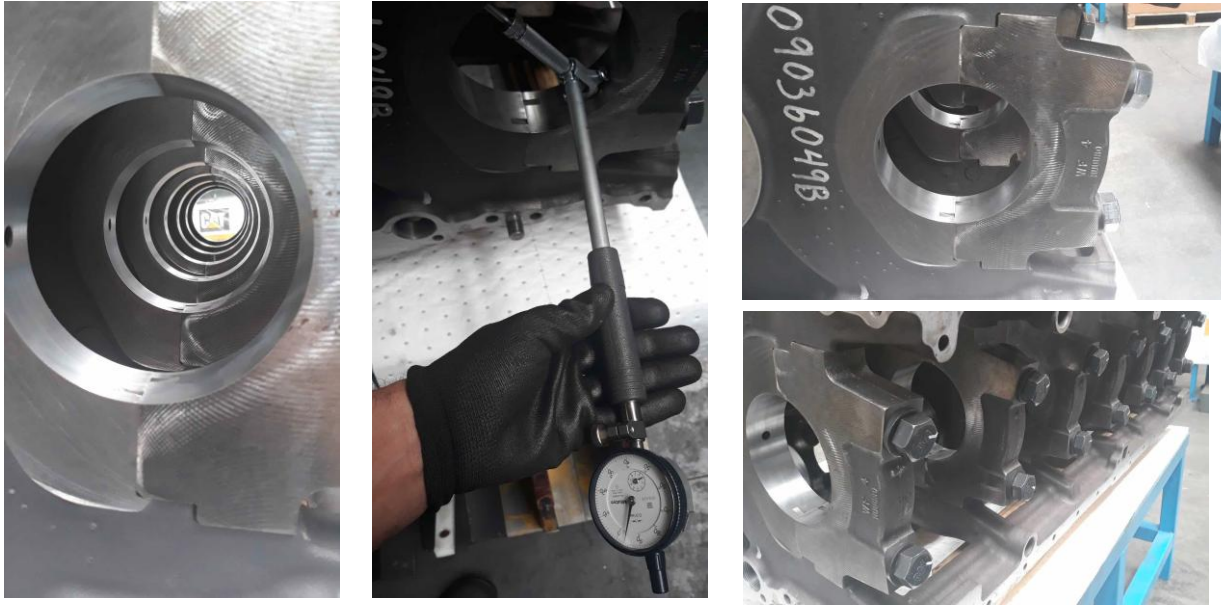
Measurement of main and crankshaft bearings and main caps.
